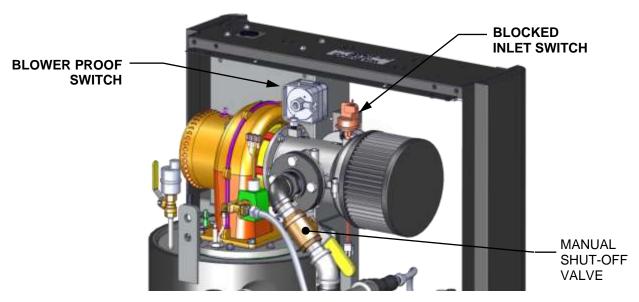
Blower Proof & Blocked Inlet Switch Locations – BMK750 &1000
